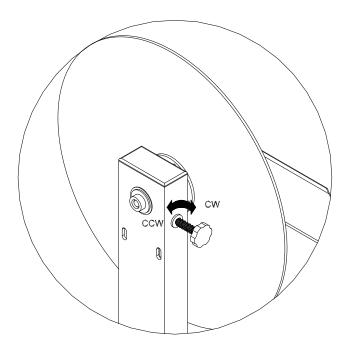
Illustration of Despool Brake Adjustment Knob
